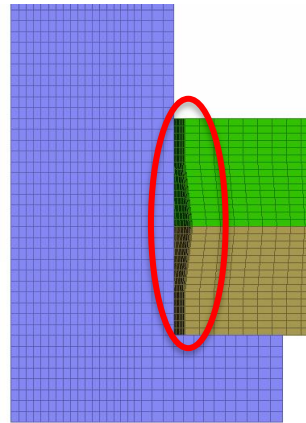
Hole wall shaped due to stamping. Convex hole geometry.
